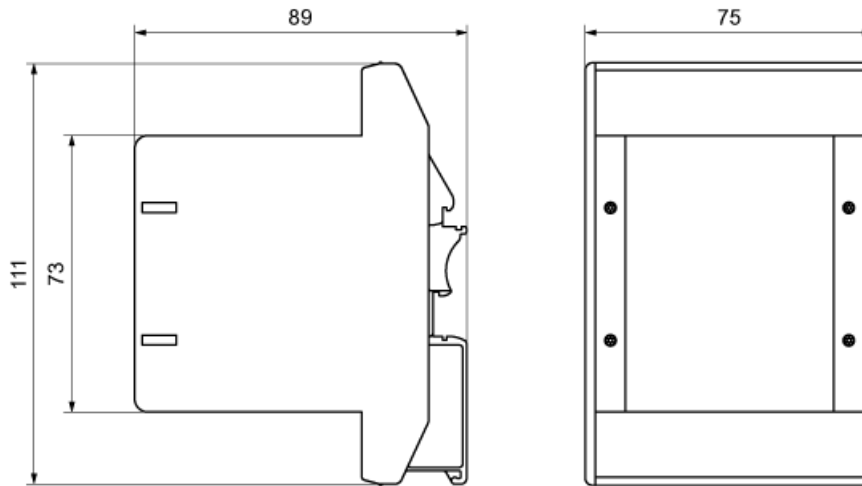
Dimension drawing of the Safe Brake Adapter (data in mm)
